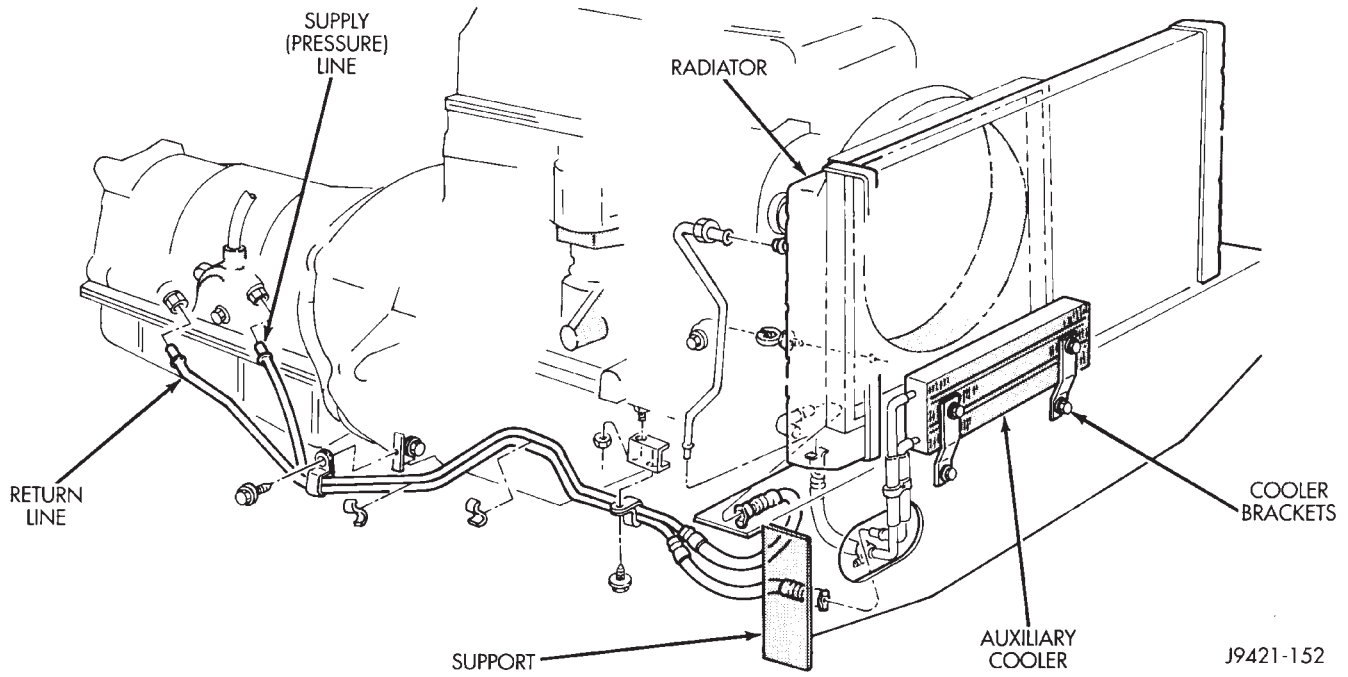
Auxiliary Cooler Mounting (Right Hand Drive)
